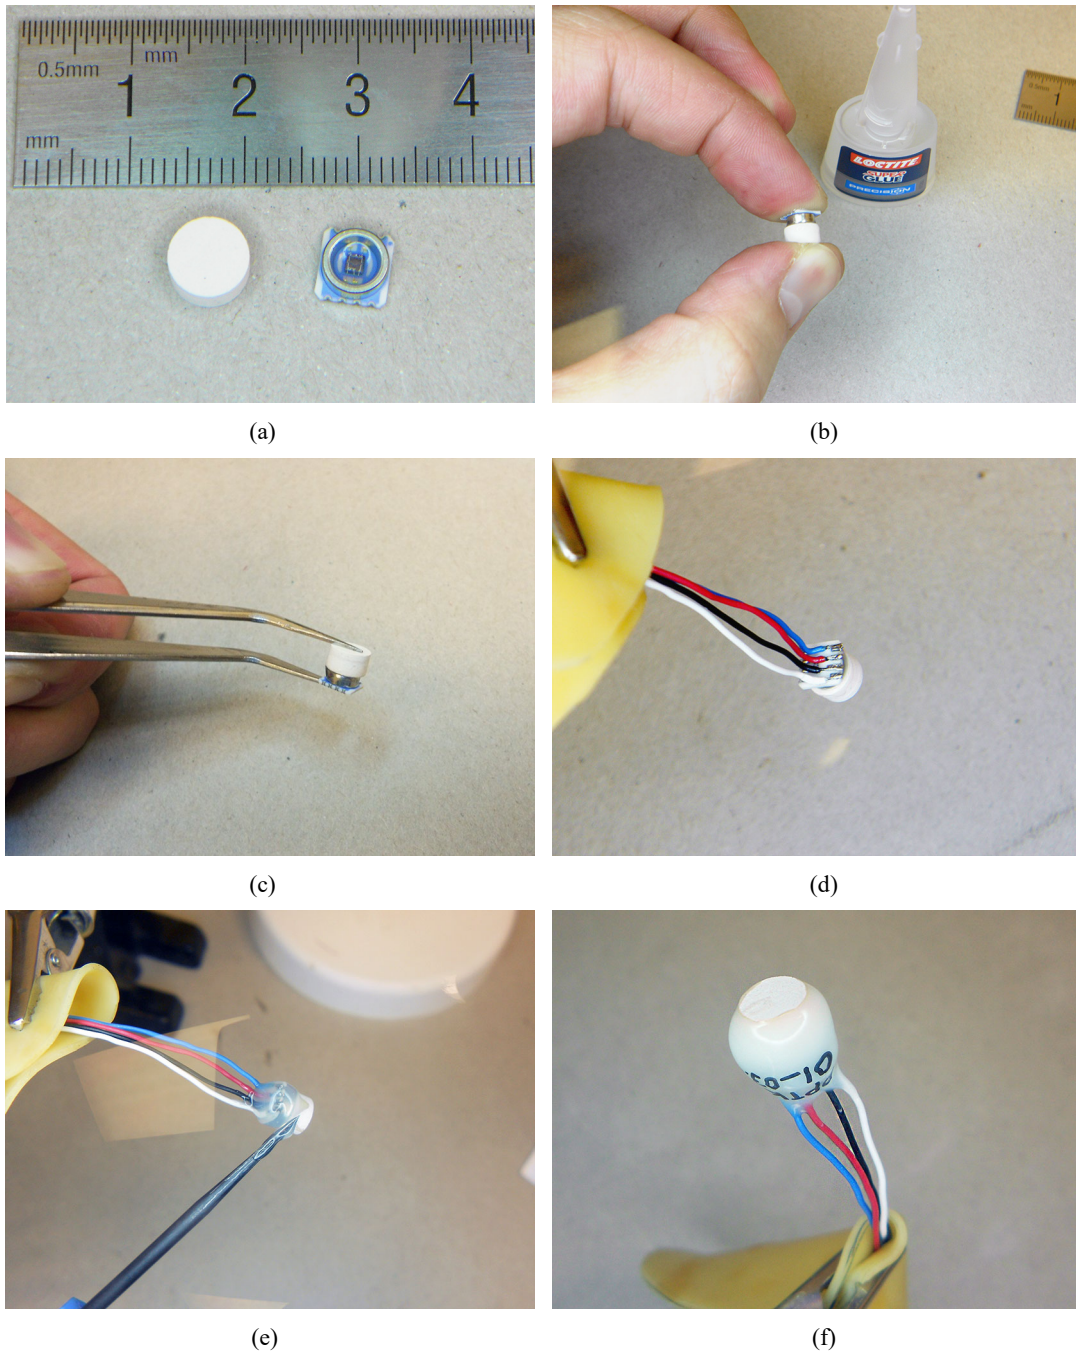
Assembly of tensiometer: (a) cleaned ceramic filter and pressure sensor; (b) adhering of ceramic to metal cap of pressure sensor; (c) assembly ready for wire connection; (d) soldering of cables to sensor body; (e) application of epoxy coating; (f) final assembled tensiometer with cured epoxy
